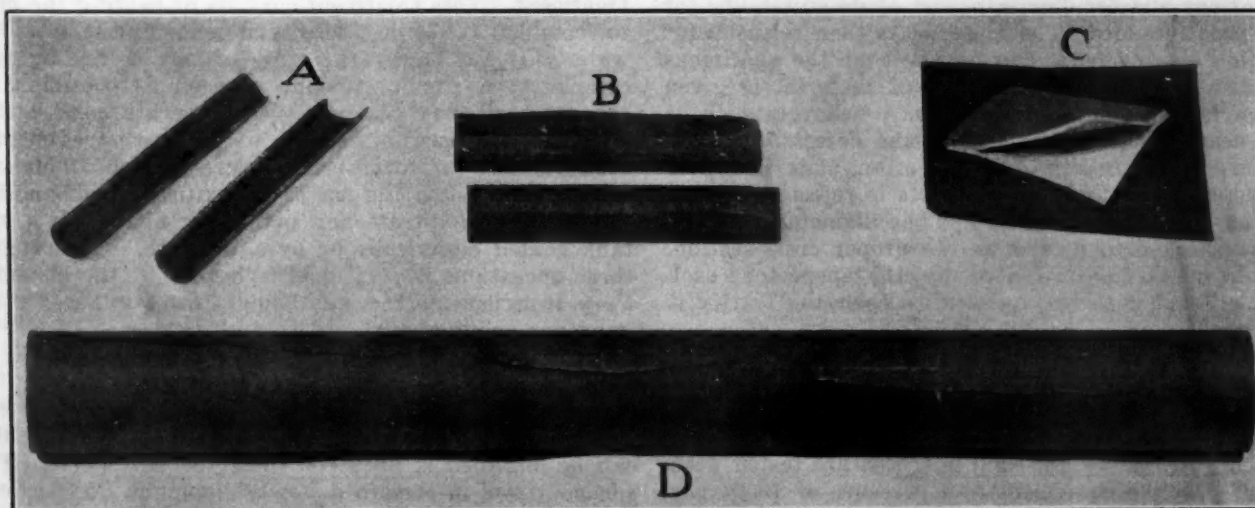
SOME DEFECTS FOUND IN METAL PARTS
